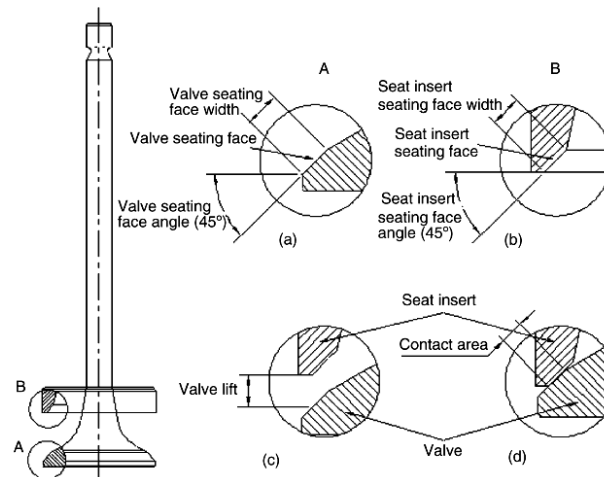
Geometry structure for the seating faces of valve and seat insert. (a) valve; (b) seat insert; (c) valve open; (d) valve closed [249].
